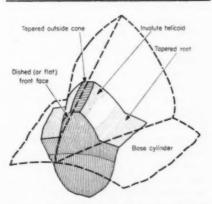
Actual beveloid tooth (back cone or face invisible)
